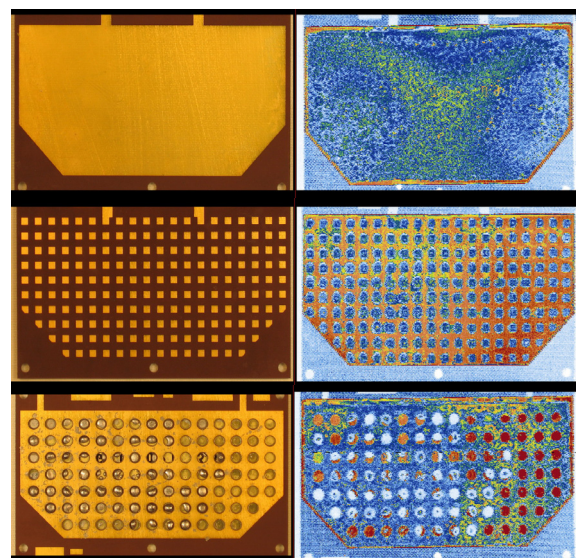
Three different footprints with the ultrasound inspection of the soldering joints.
